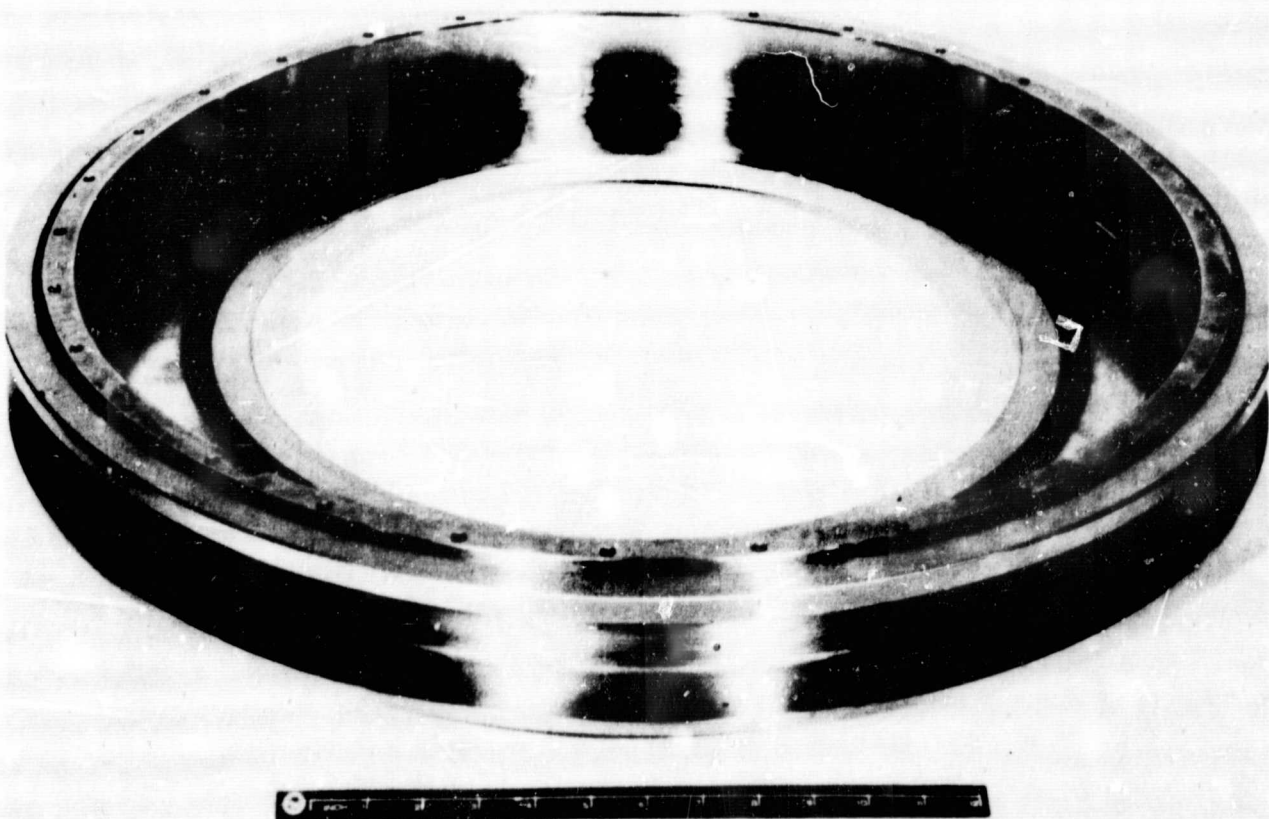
Test Rig End Seal Disk with Seal Face Down (XP-83363)
